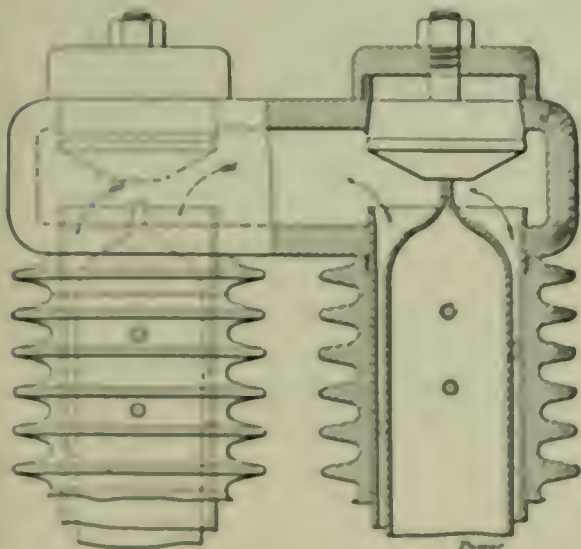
SECTIONAL VIEW THROUGH RETURN HEADER
